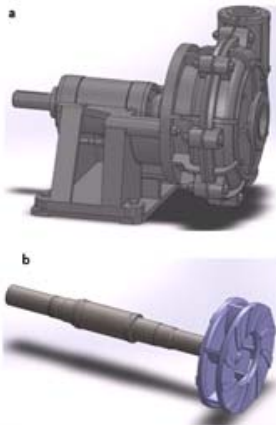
Three-D model of a slurry pump: (a) pump; (b) impeller and main shaft
